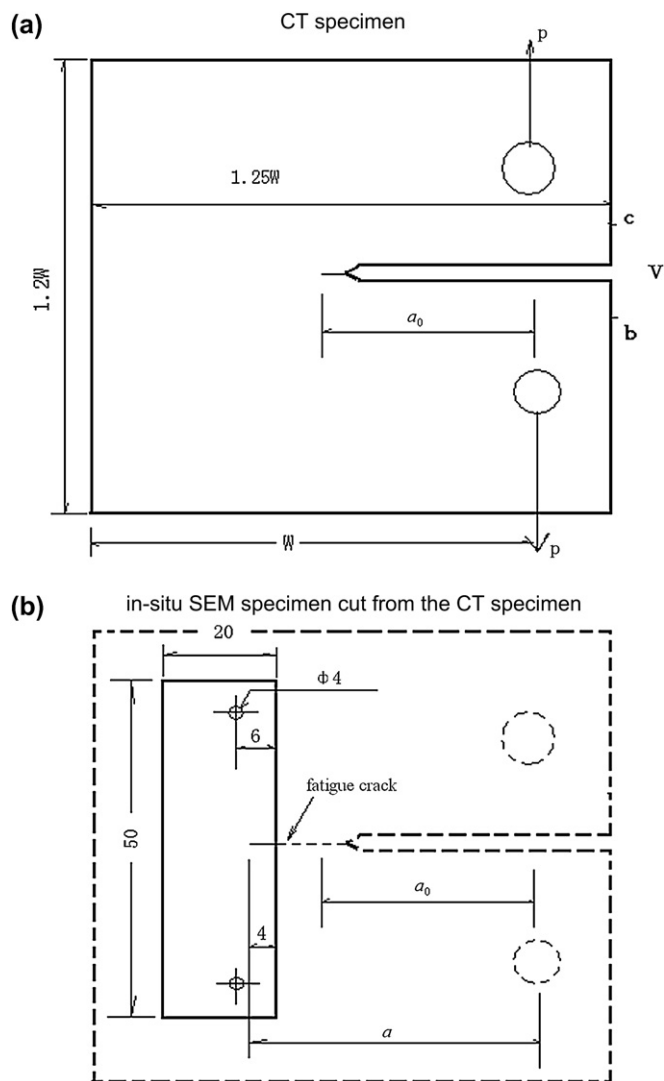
Geometry and dimensions of the specimens with w being the width of specimen, V the displacement measured by the displacement gage mounted on the specimen between b and c , P is the fatigue load.
